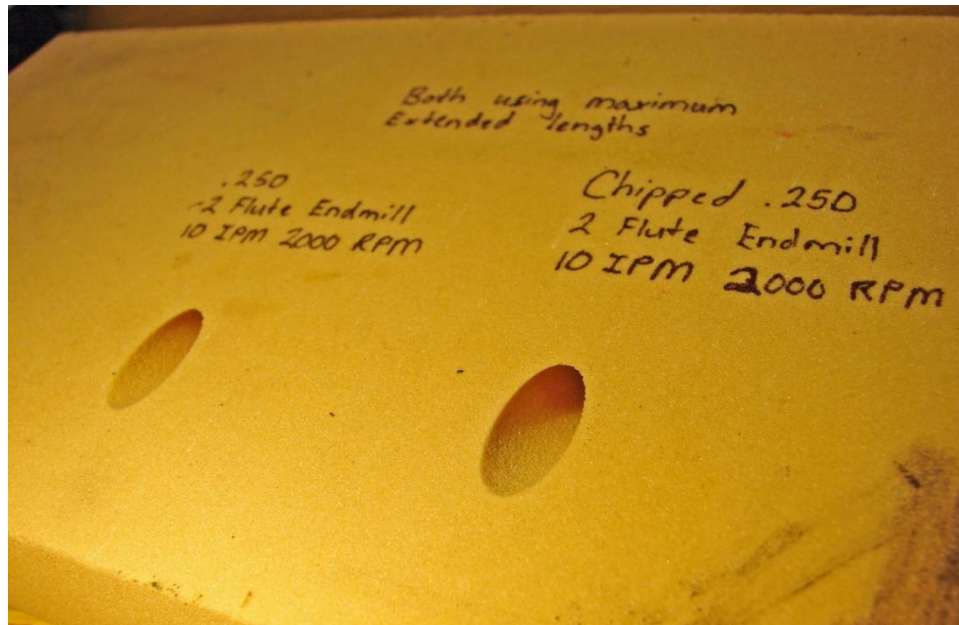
Photograph of metering section of coolant holes machined using a long tool extension, the same method used to machine the PSU polyurethane coupon.
